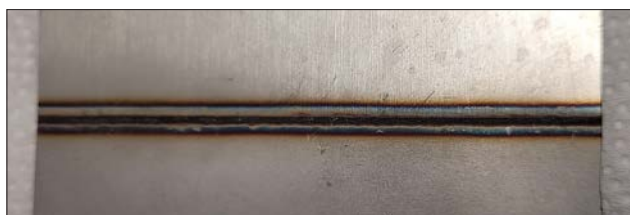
Laser beam welded joint (method 521) made of steels 304L and 904L
